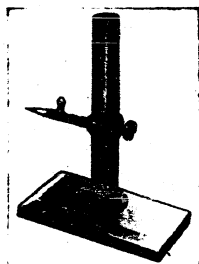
A Device for Measuring Clearances in the Assembly of a Landing Gear
